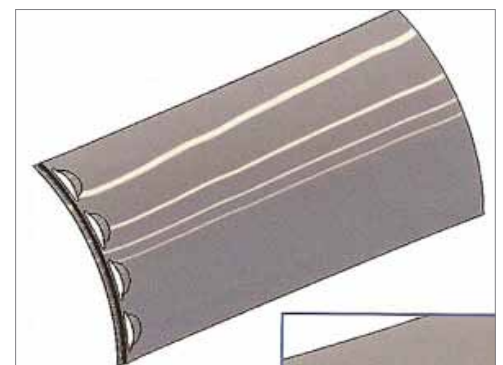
Component of the acoustic barrier assembly that is produced in stamping operation
